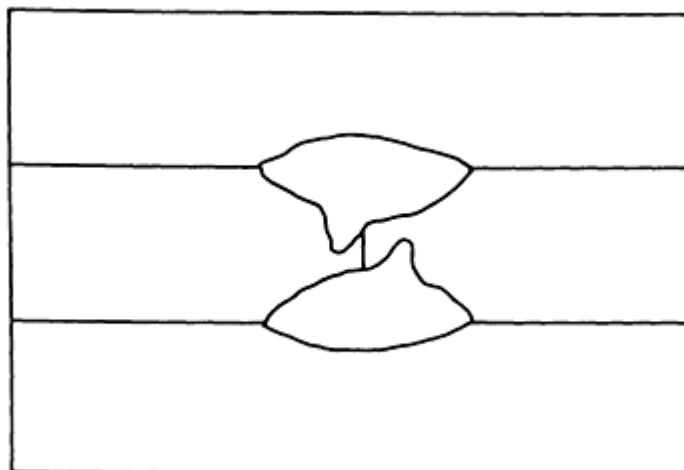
OFF-CENTER PENETRATION OF CENTRAL CORE OF WELD USING ARGON SHIELD
